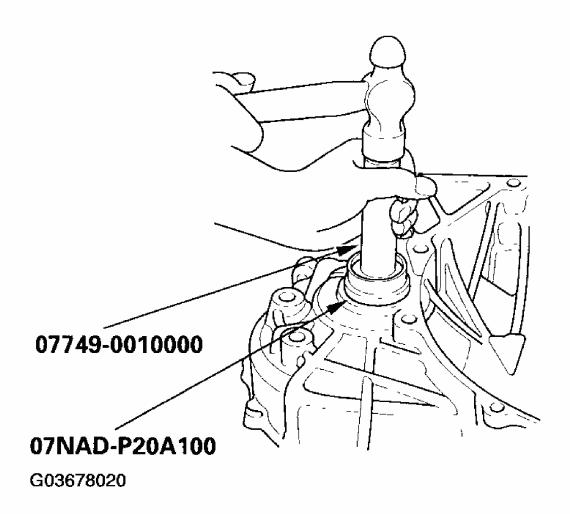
Installing Oil Seal In Clutch Housing Courtesy of AMERICAN HONDA MOTOR CO., INC.
